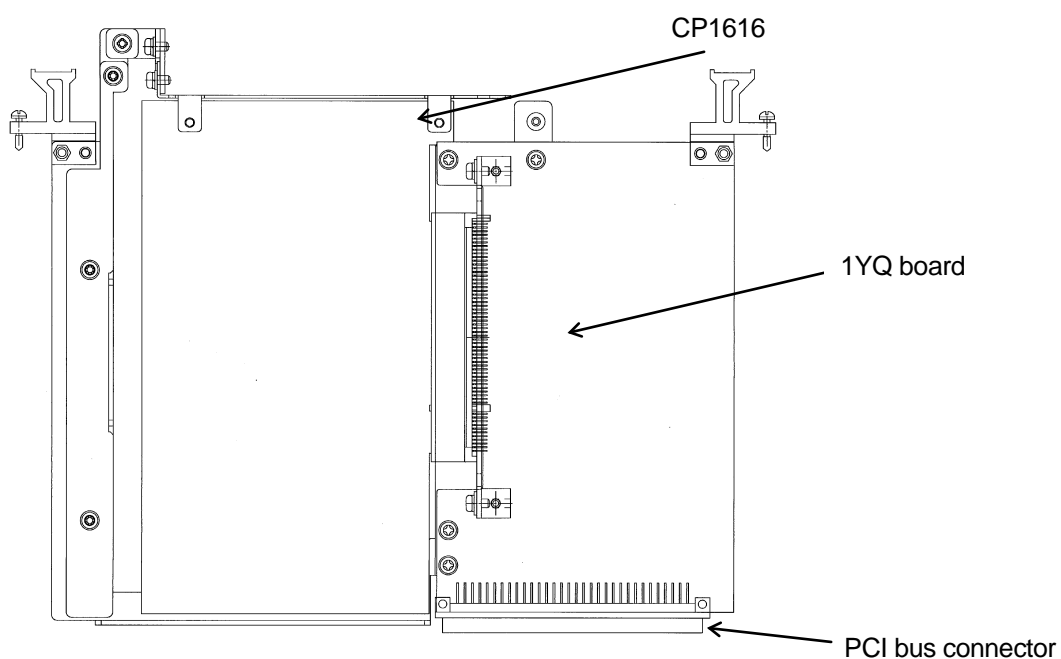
Outline view of interface board when CP1616 card and 1YQ board are connected (Top view)
